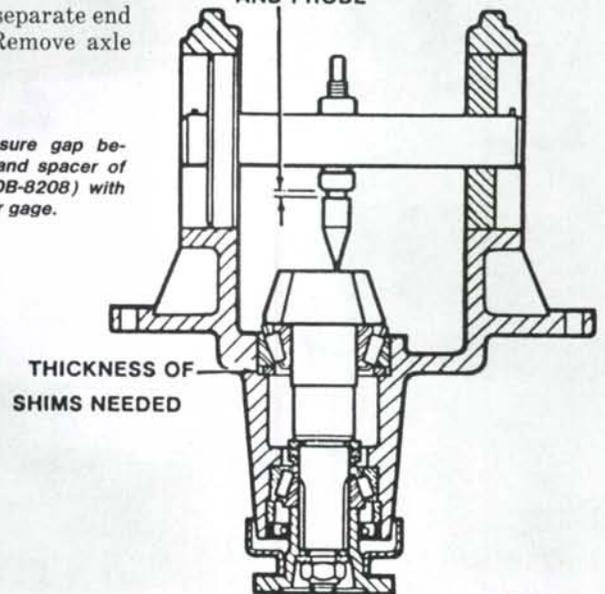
Measure gap between probe and spacer of special tool (DB-8208) with a feeler gage.
